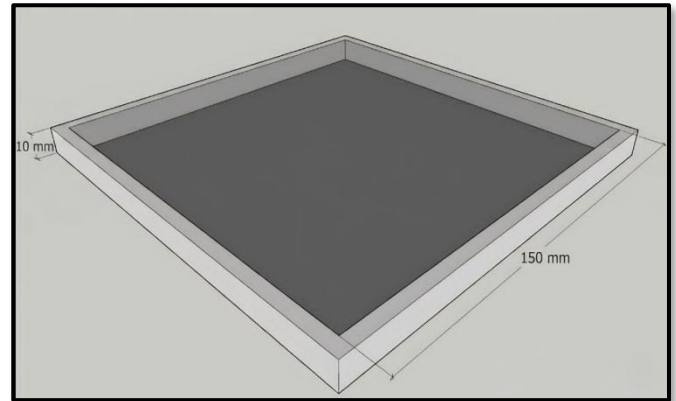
Dimension of Steel Mold Utilized for Fiberboards Fabrication.
